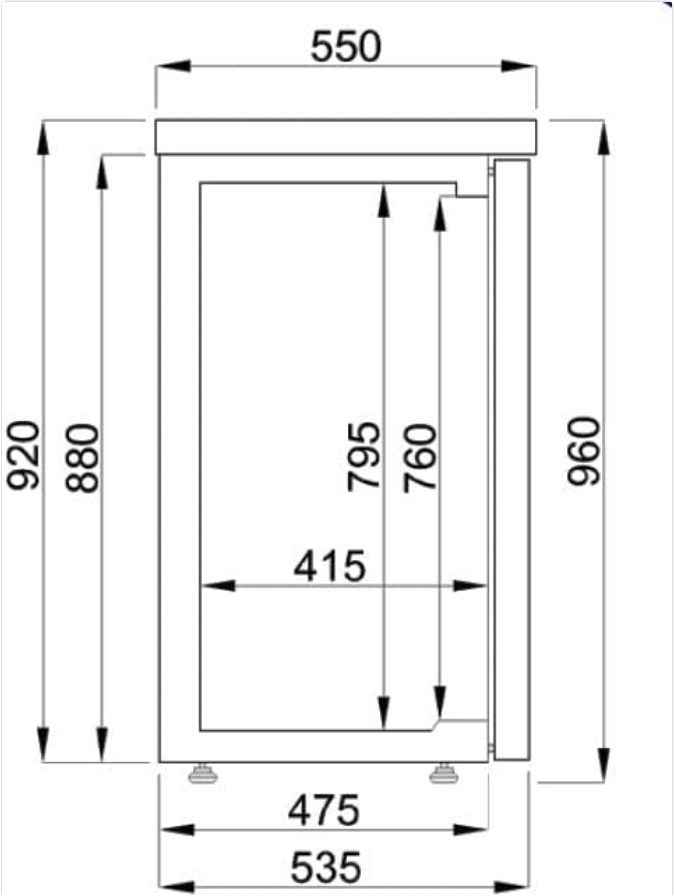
Technical drawing illustrating the dimensions of the CombiSteel 500L 3-Door Refrigerated Back Bar Cooler. Key
